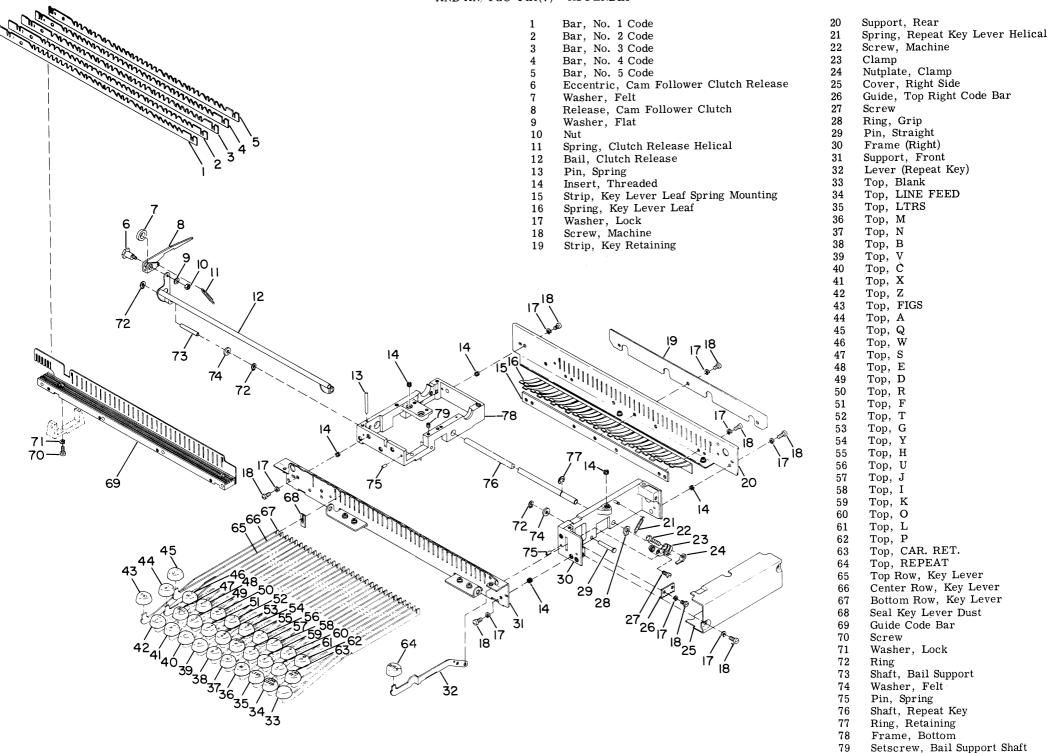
Keyboard Assembly (Sheet 1 of 3) SL-4-03315B Figure 6
